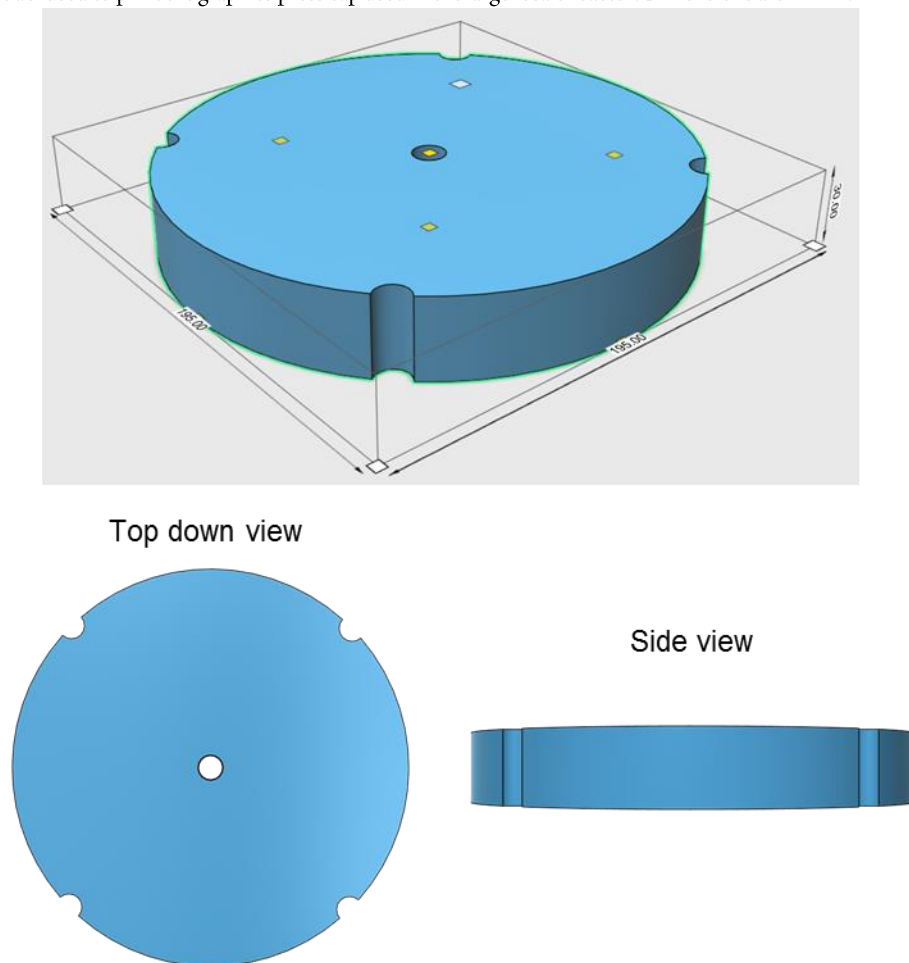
3D model used to print the weight platform used in the larger scale reactor. Dimensions are in mm.
